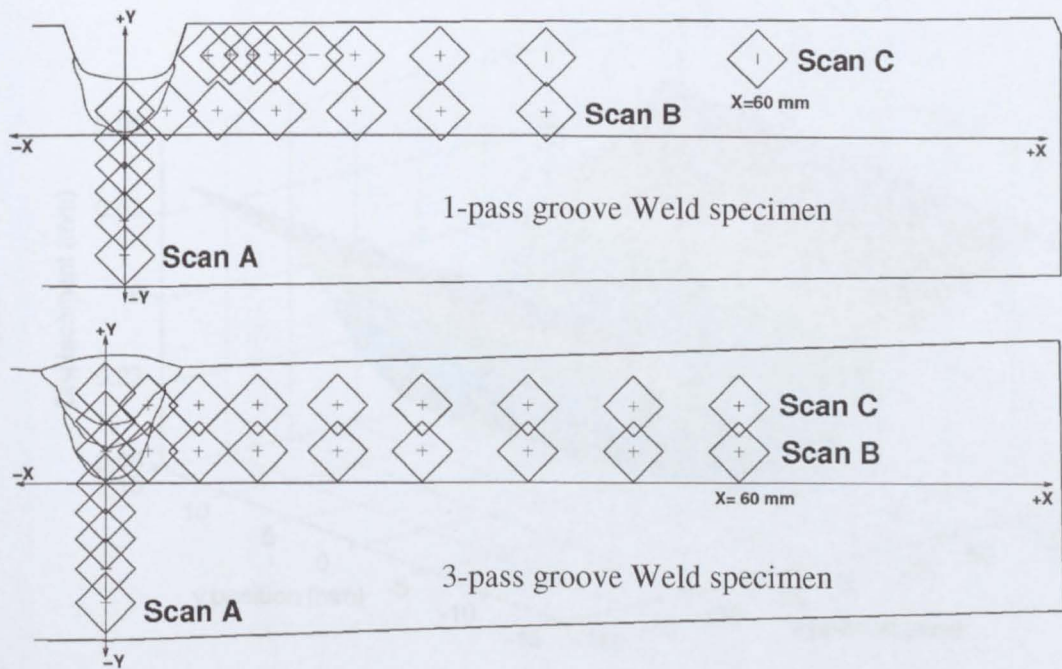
Schematic showing neutron diffraction measurement positions within each pass groove weld specimen, at the measurement plane.
